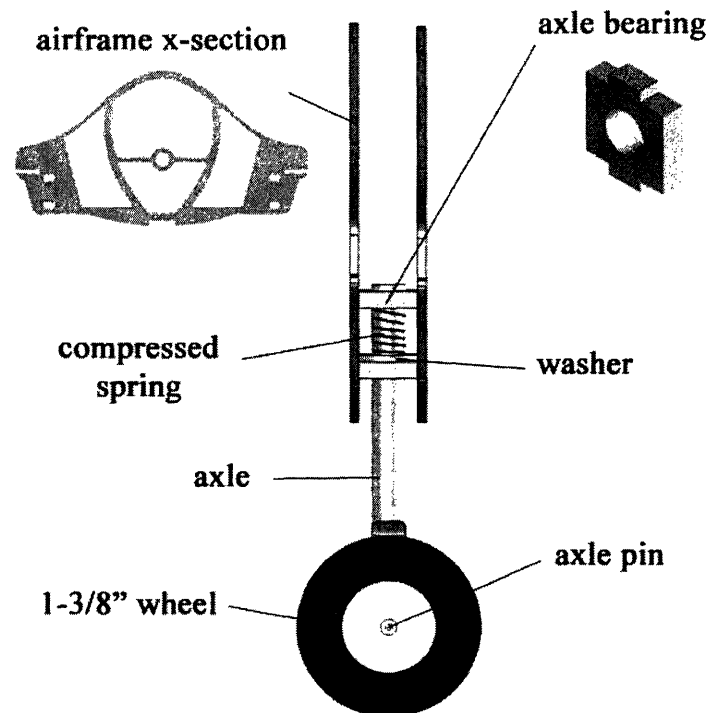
Main landing gear assembly with basic shock-absorbing design.
